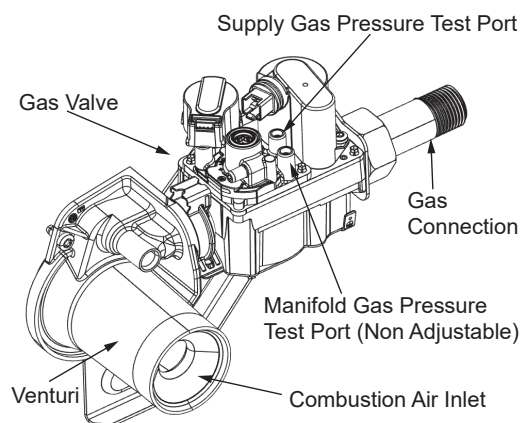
50 and 75 Gallon PX52 - Gas Valve Assembly
